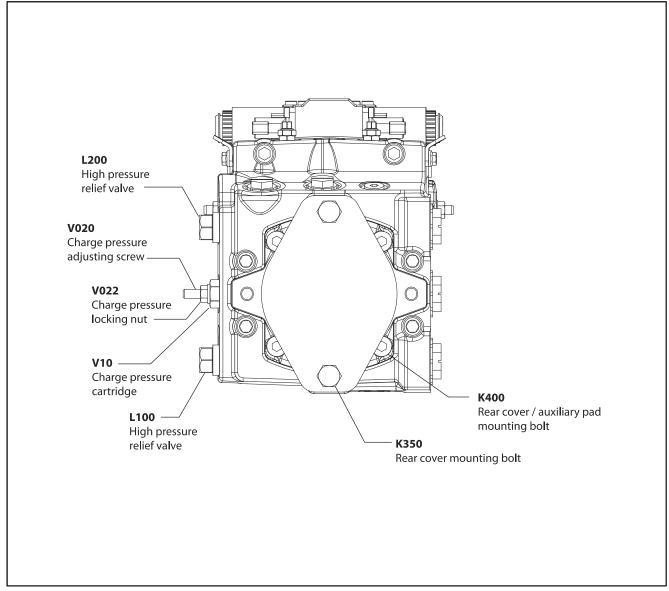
Fasteners and Plugs - Sheet 1 of 2
